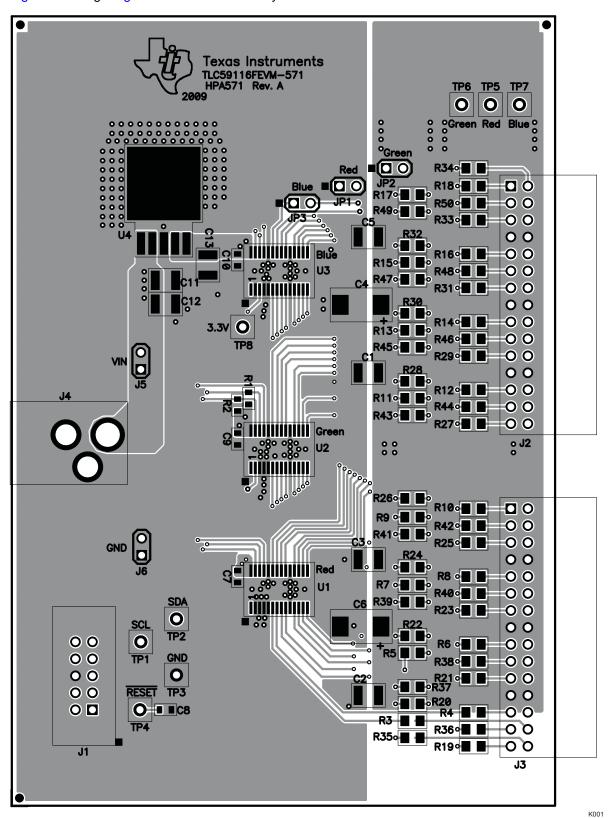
TLC59116FEVM-571 Assembly Layer Routing
